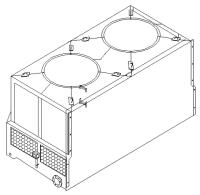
Tower Section 1 Installation for a Quadruple Fan Tower
